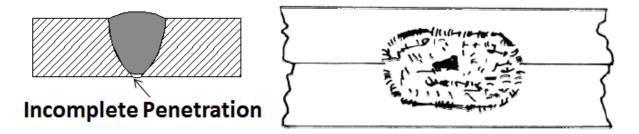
e: Incomplete penetration defect in welds
